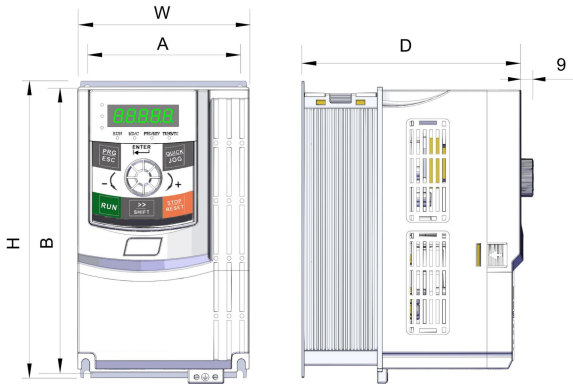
Schematic diagram of the external dimensions and installation dimensions of the plastic case chassis below 220V (3S)4.0~ 5.5kW
